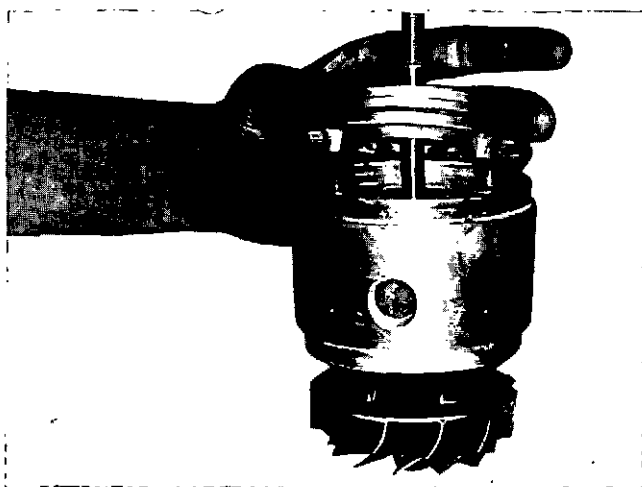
, (T3519). Installing the oil seal plate onto the bearing housing
